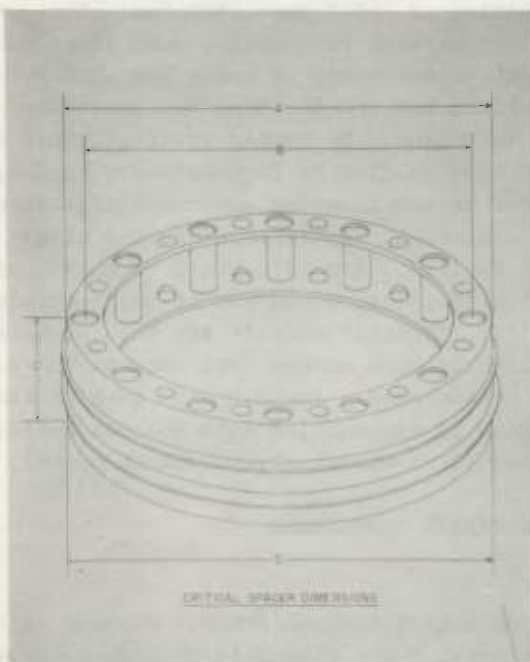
View of compressor spacer with tie-rod sleeves removed. Letter denotes critical dimensions
